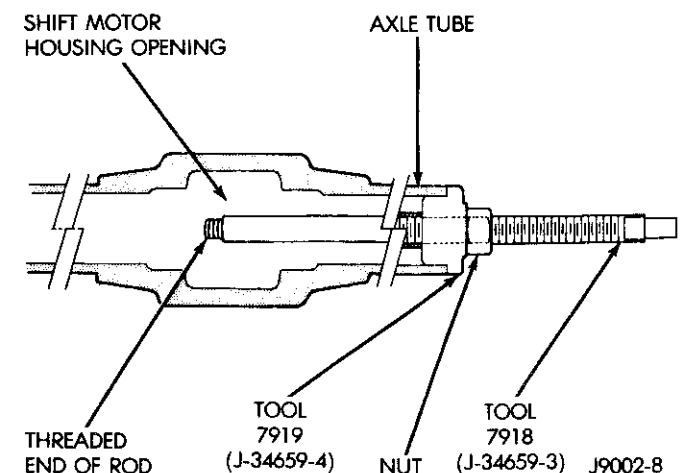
Threaded Rod Tool In The Axle Shaft Tube
